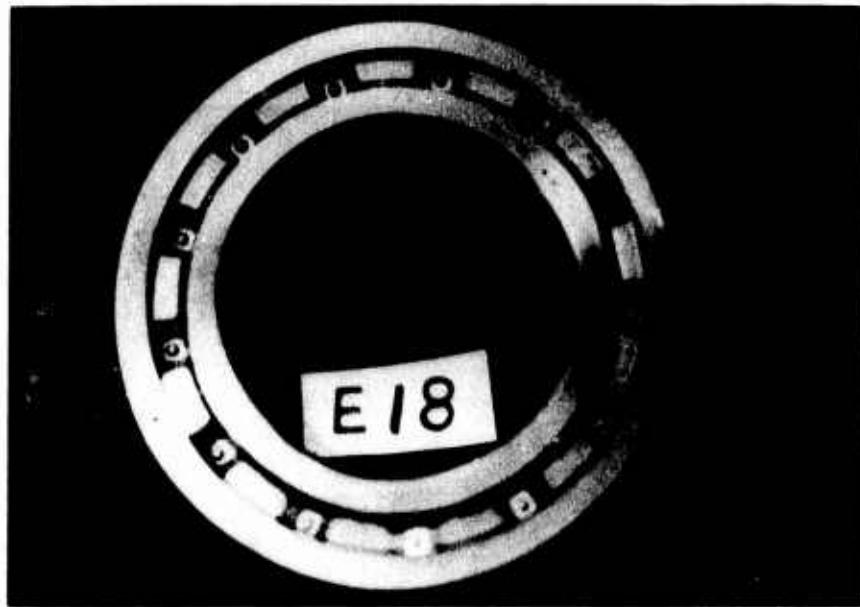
Bearing E18 Before Test (Modified Insert-Type Cage).
